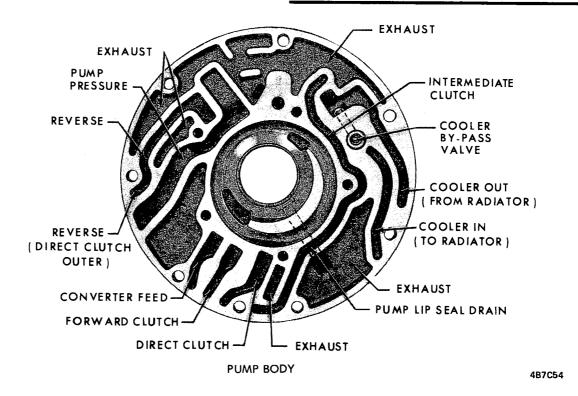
C-13 - Identification of Oil Channels in Pump Body Front Face
